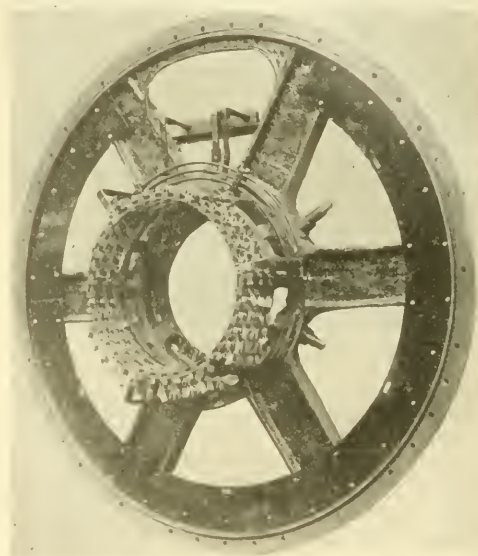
BRUSH RIGGING MOUNTED ON MAIN MOTOR BEARING BRACKET
